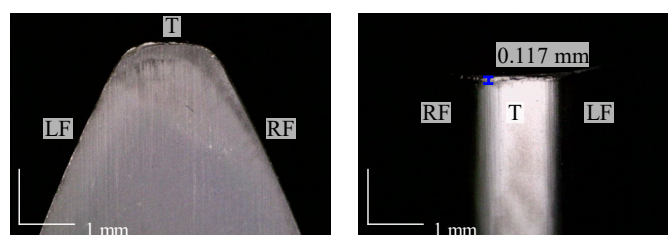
Tool wear on tool 1 at the SOL after machining 30 workpieces with the new process parameters.
